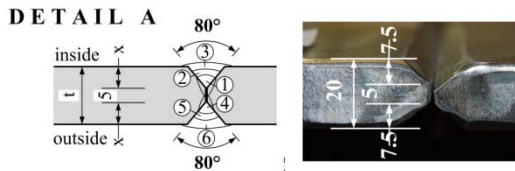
Weld preparation of Detail A and welding sequence,  $t = 20 \text{ mm}$
